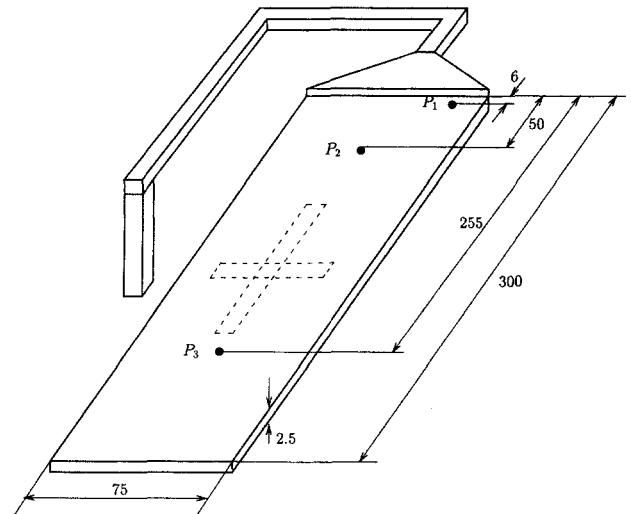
Rectangular strip mold B (ABS) (dimensions are in mm).
